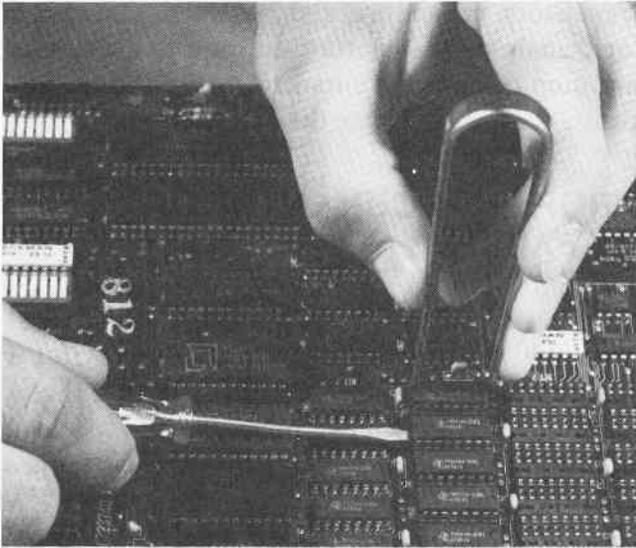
ICs can be removed with a chip extractor or by gently prying up with a tiny screwdriver (tweaker).
